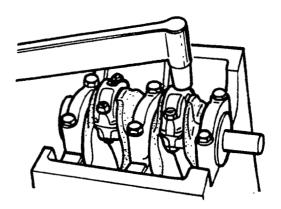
TIGHTENING CONNECTING ROD GAP
